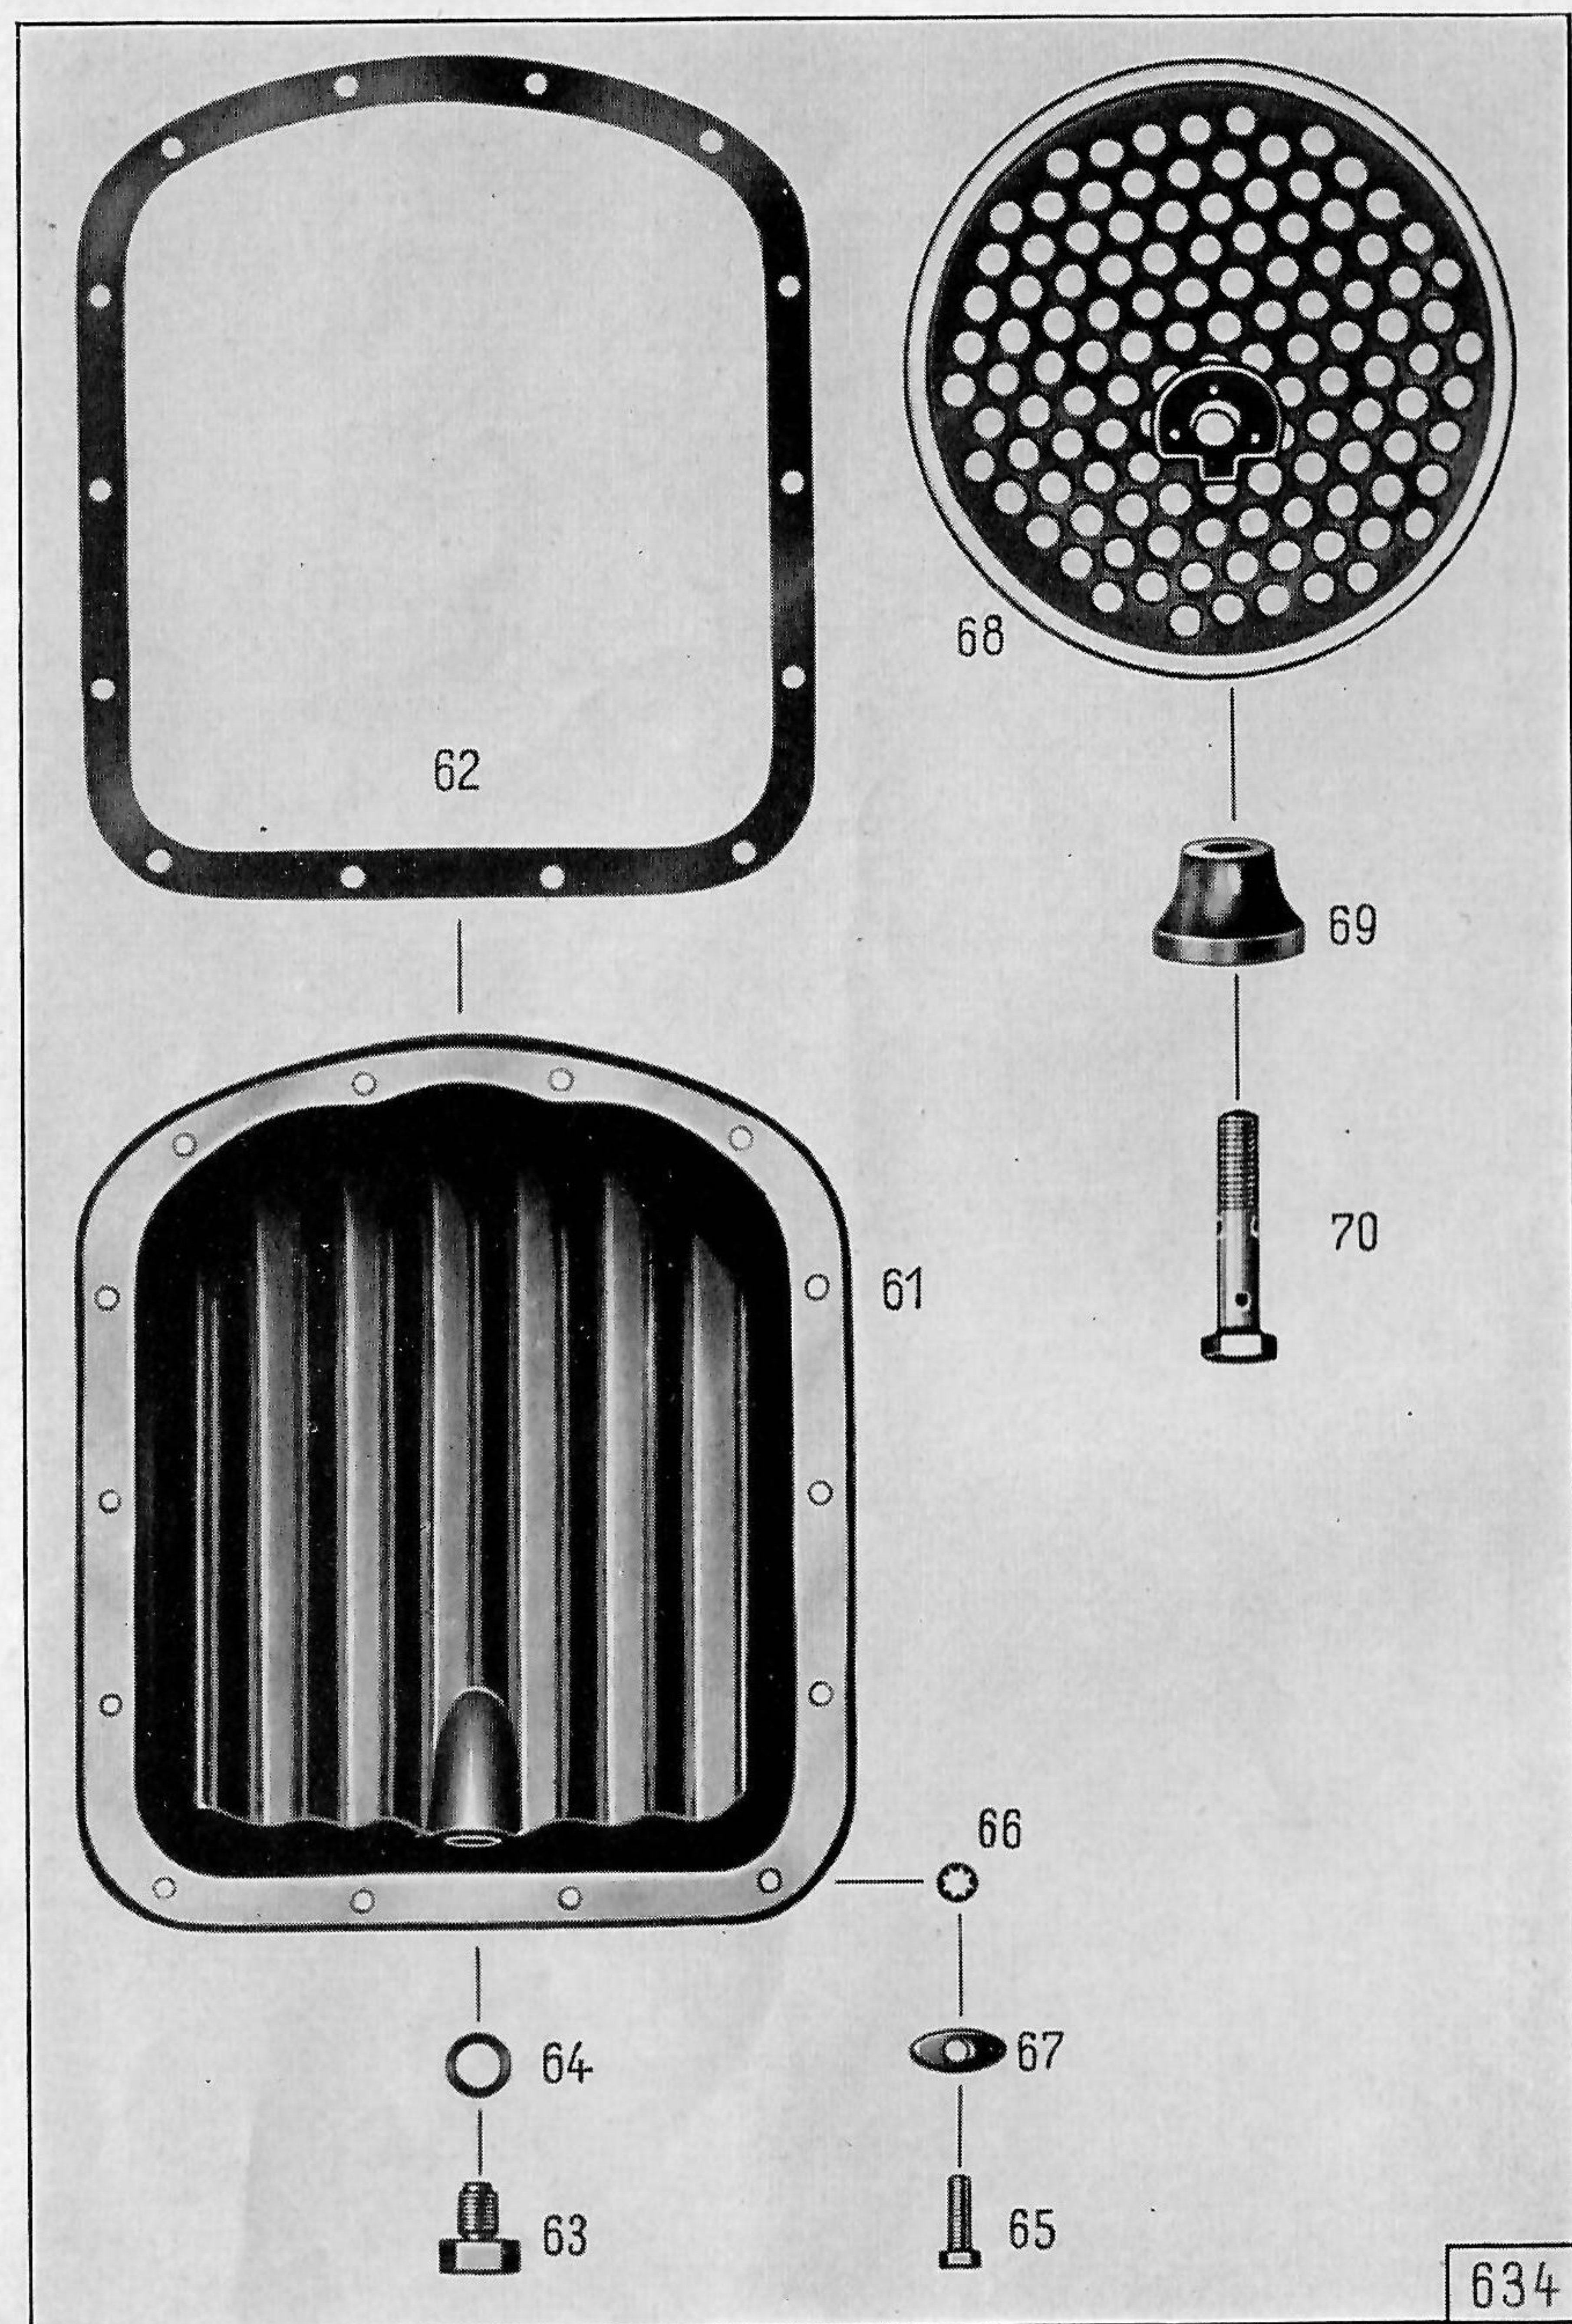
, Group M: b) Housing and Cylinders, Oil Sump, Oil Filter
